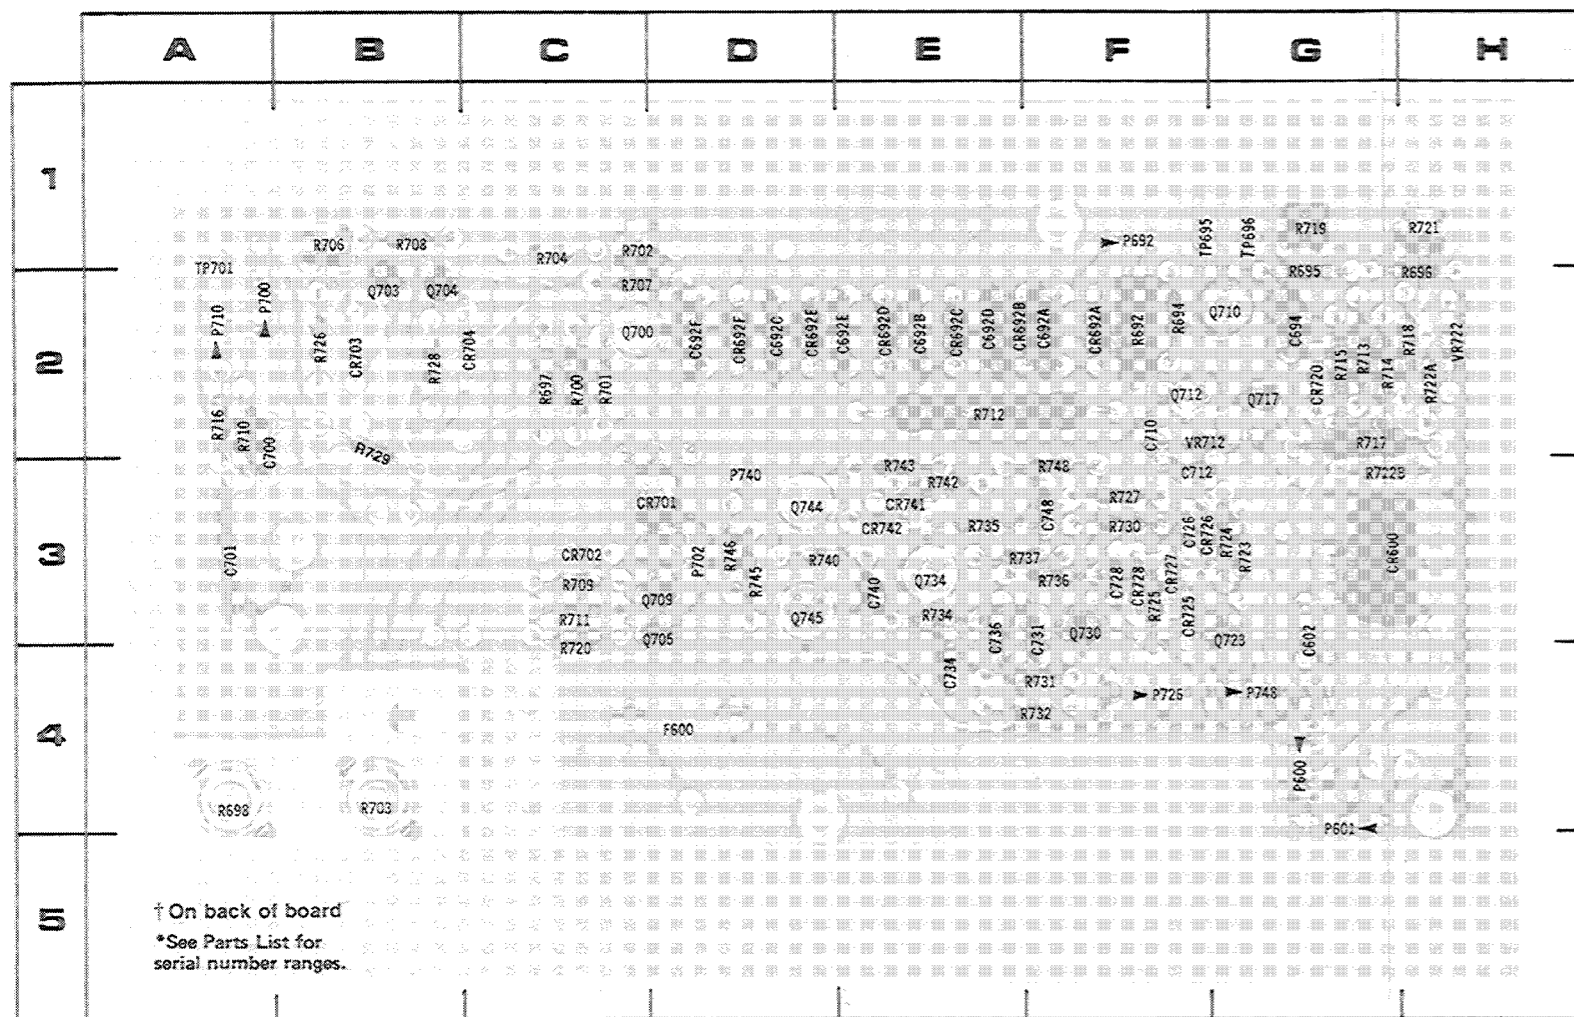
A. A6—HV & Unblanking circuit board (SN 300651-up).
